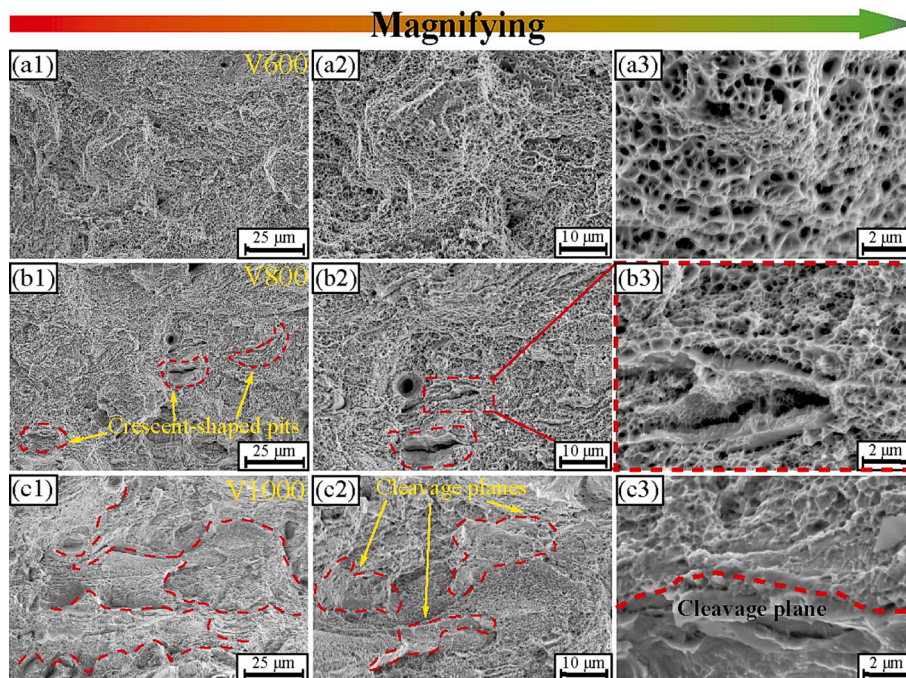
Fracture surfaces of the V600 (a1-3), V800 (b1-3) and V1000 (c1-3) samples after tensile testing.
